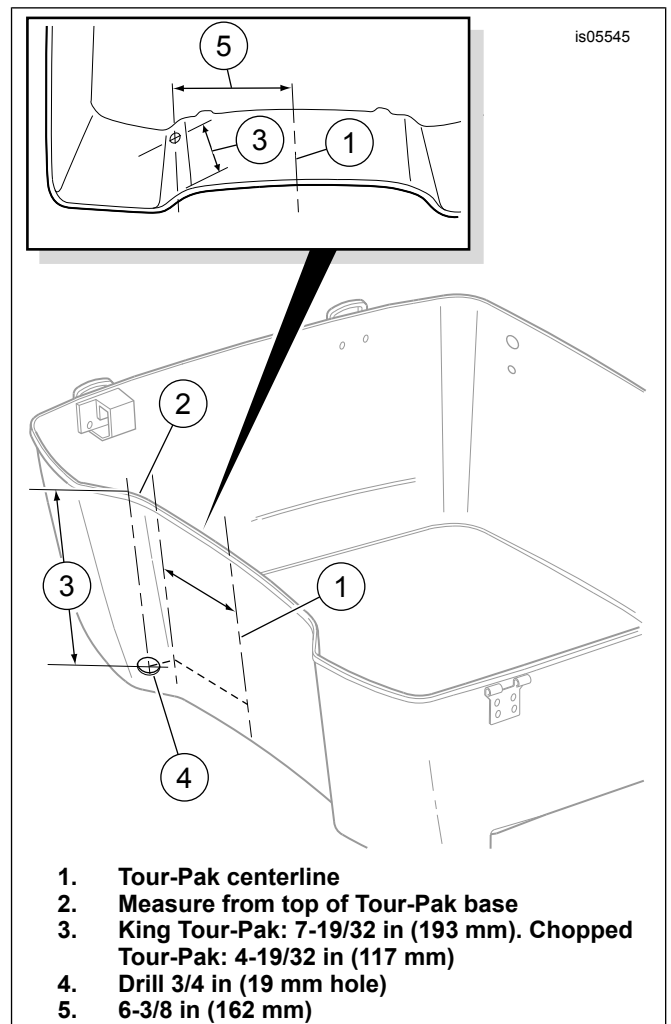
CB Antenna Cable Drilling Location (Type 2 Tour-Pak)
